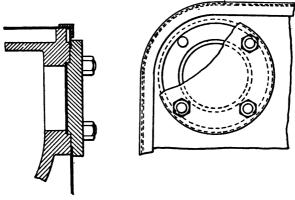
Bonnet flanges designed to hold the lagging in place.
